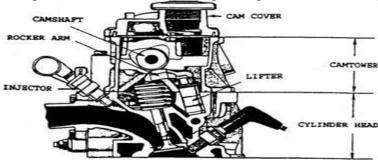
An overhead camshaft engine. On the other hand an overhead valve engine has the following main advantages :
